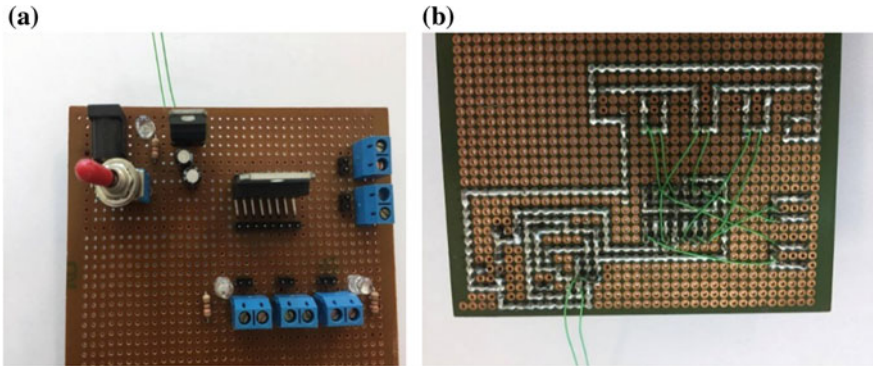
Circuit of motor drive. a Front side and b back side
